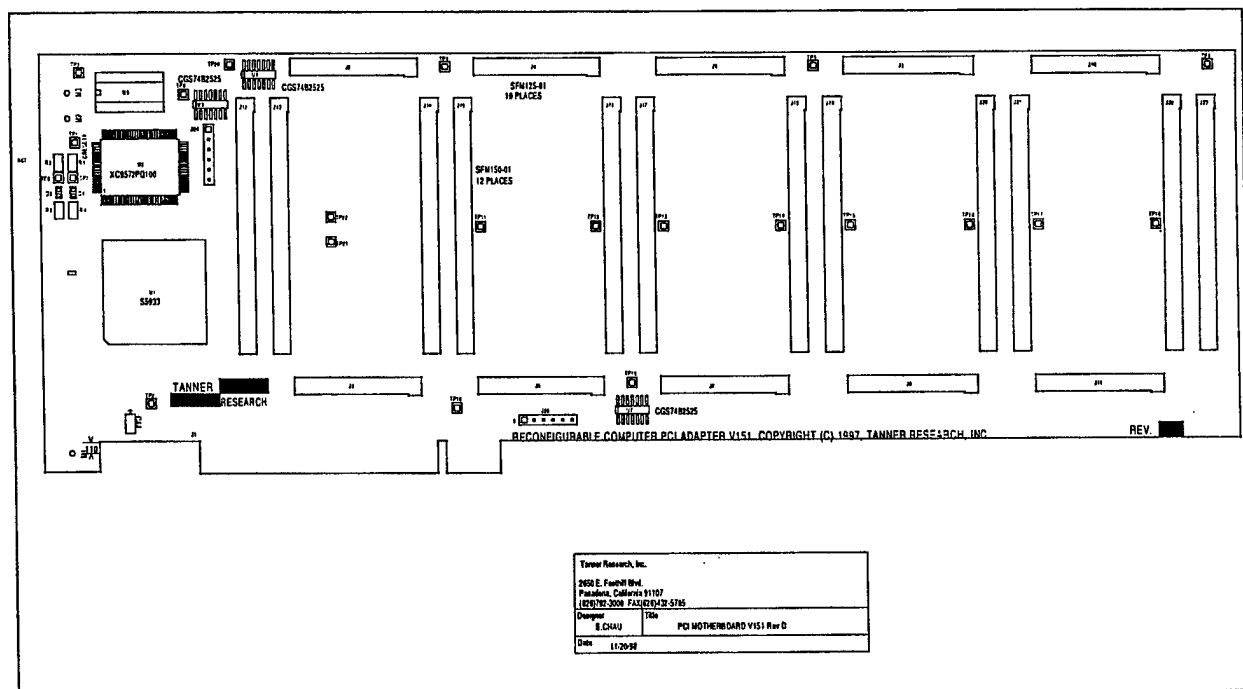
Motherboard Top Layer Assembly Drawing (15381ast)
